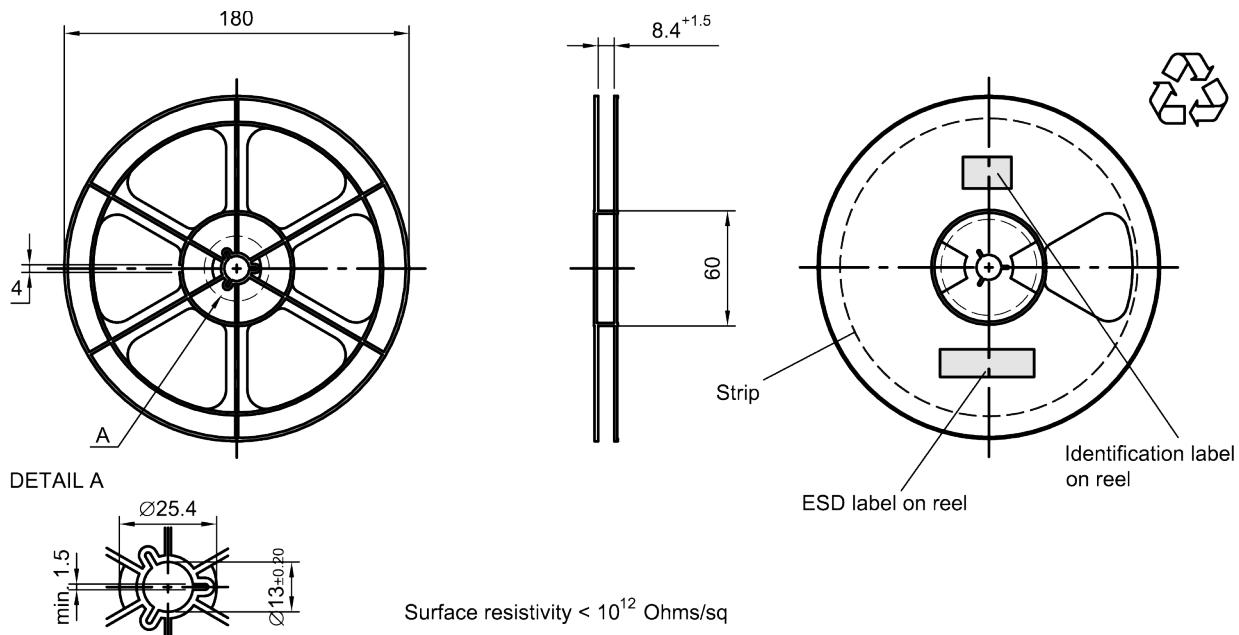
Drawing of reel (first-angle projection) with diameter of 180 mm.
